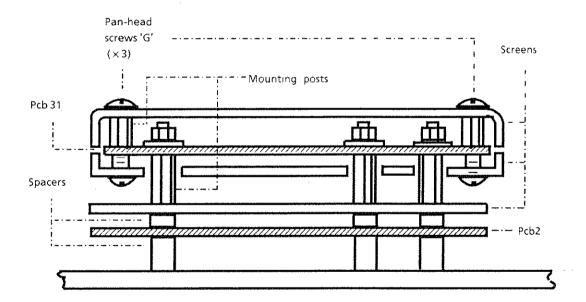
Pcbs 2 and 31 on Front Panel Assembly.
